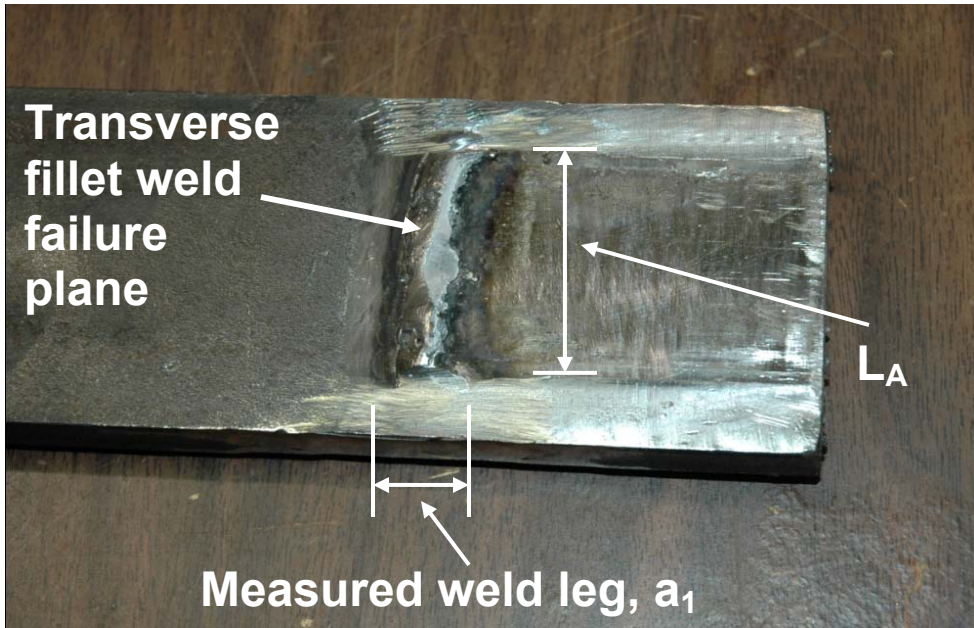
Photograph of typical fractured transverse fillet weld showing failure plane
